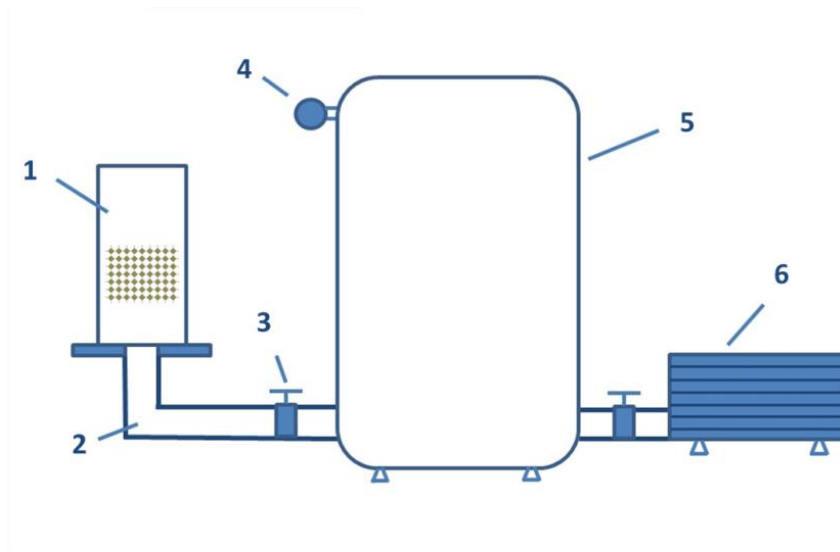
Schematic presentation of negative pressure casting process (1- Mold, 2- Vacuum pipe, 3- Valve, 4- Manometer, 5- Vacuum tank, 6- Vacuum pump)
